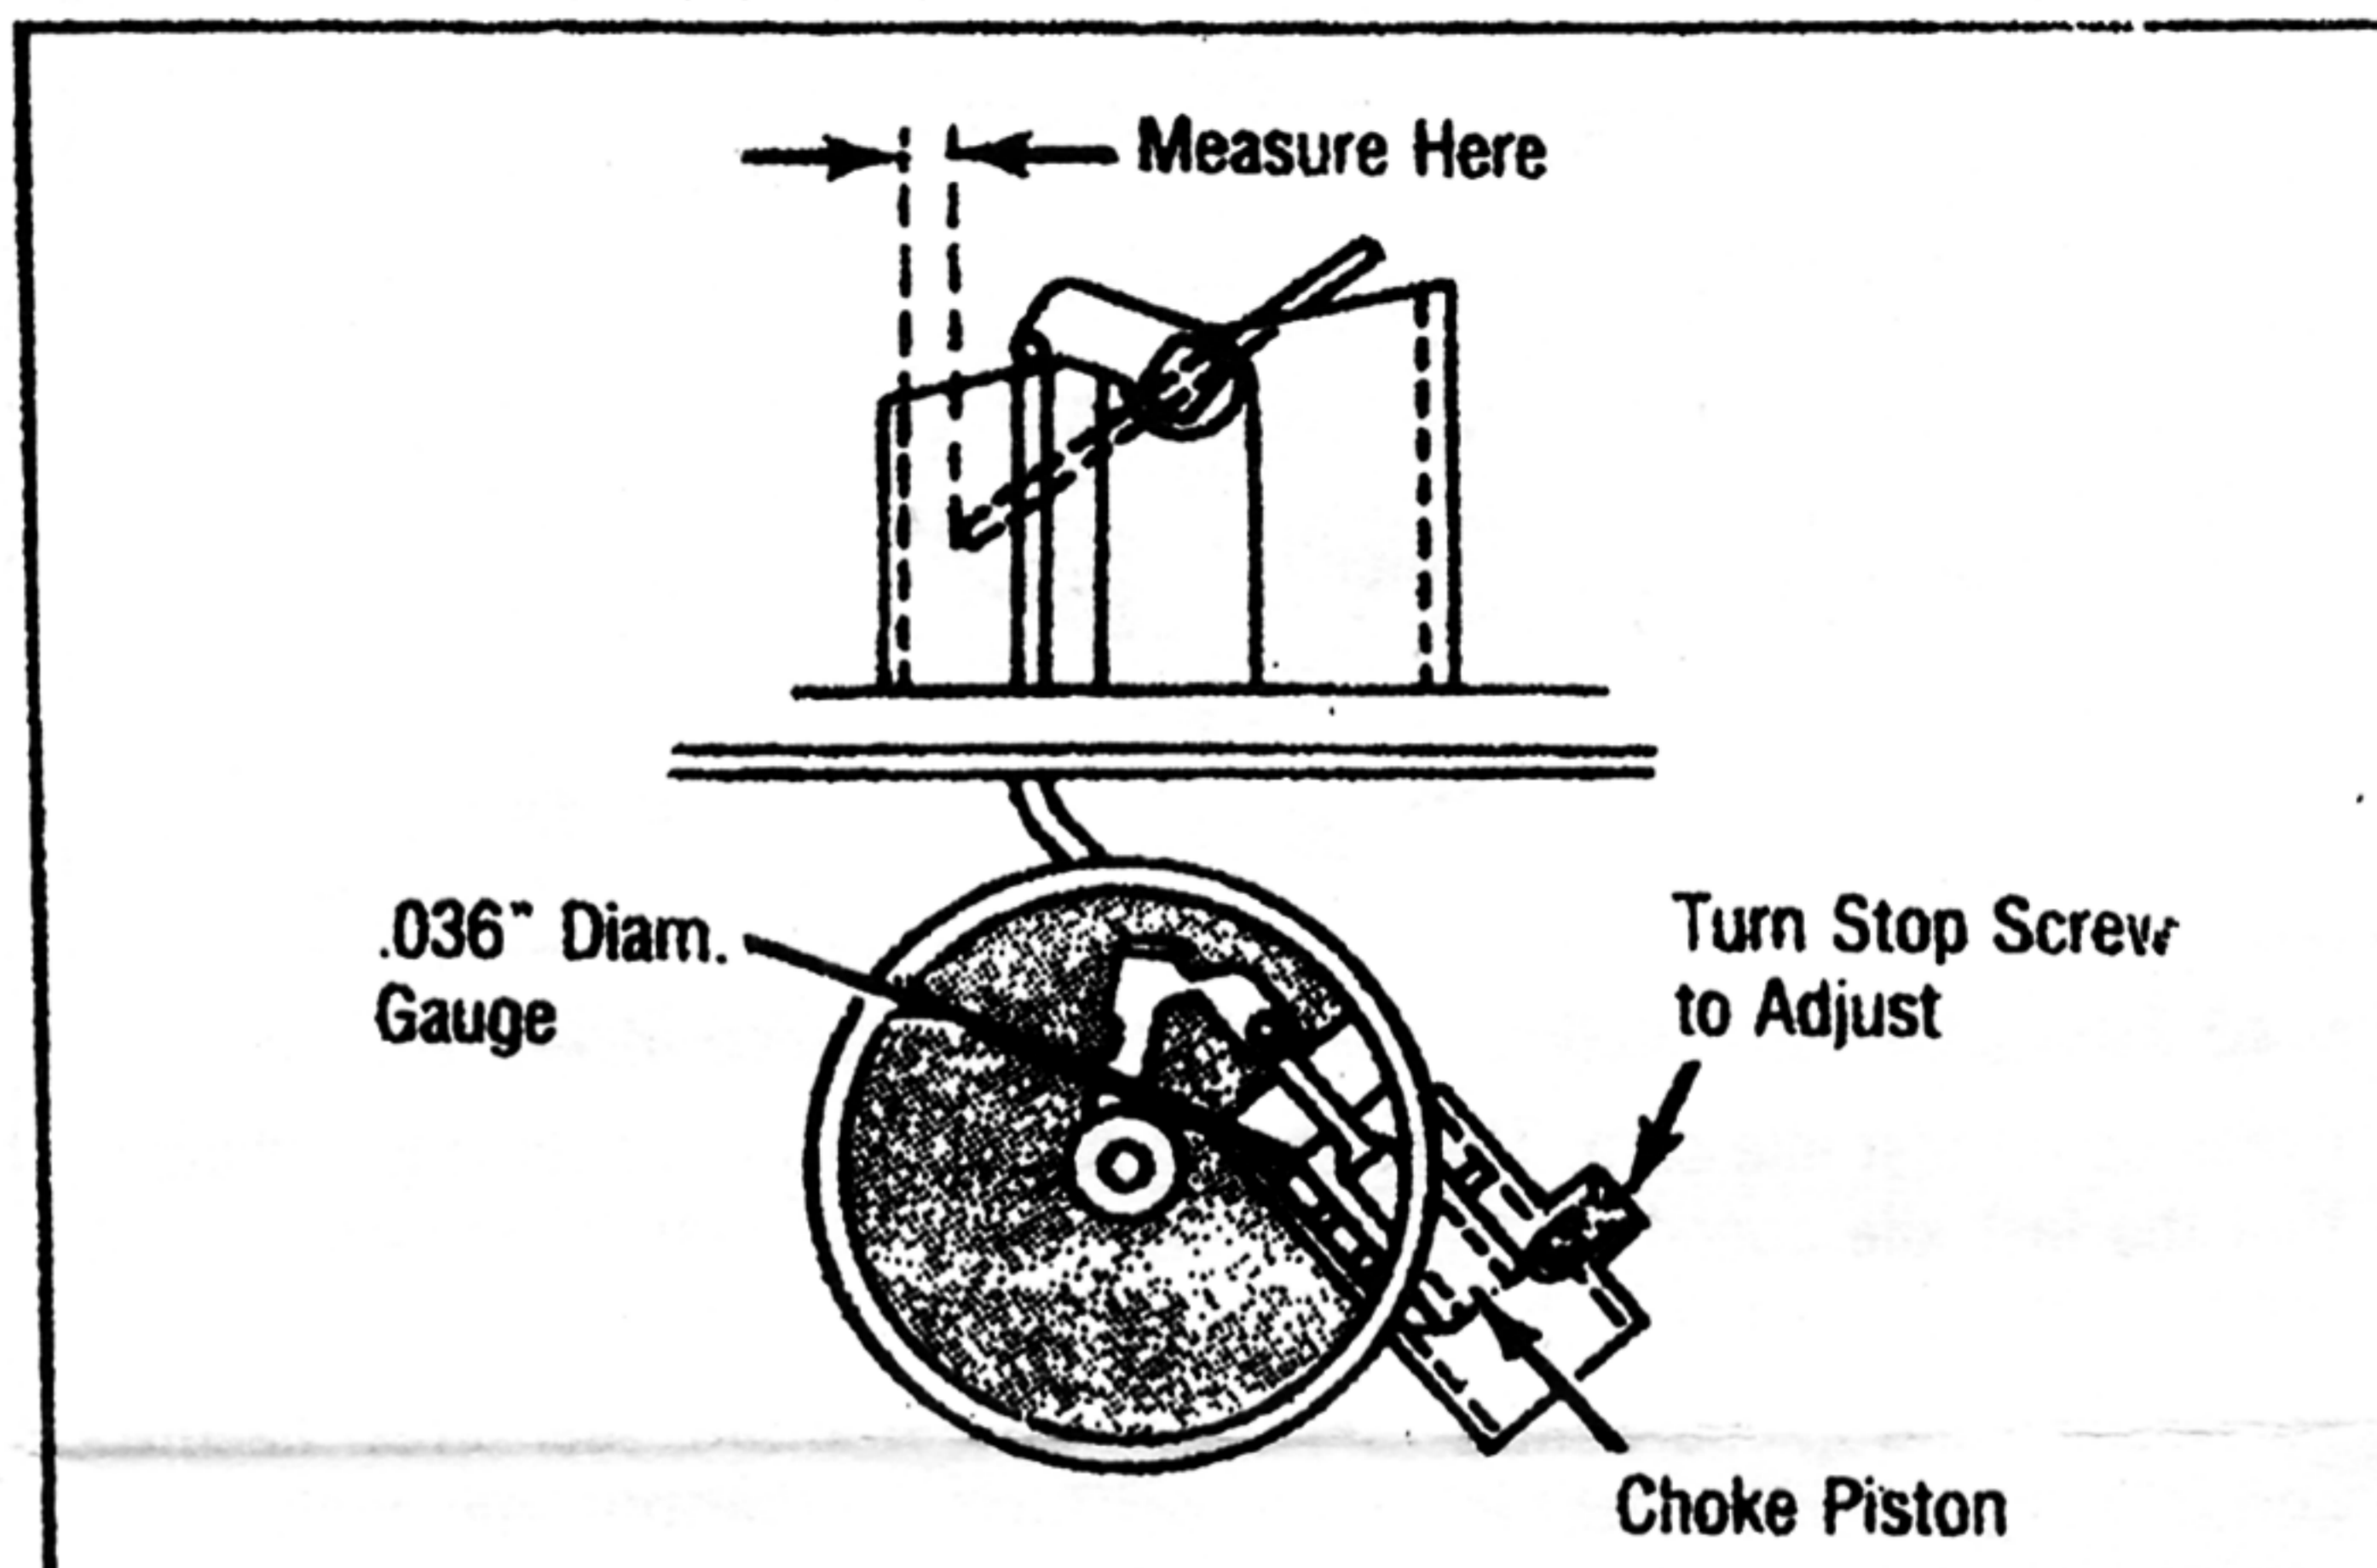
Choke Pull Down Adjustment (Late Integral Piston Type)
